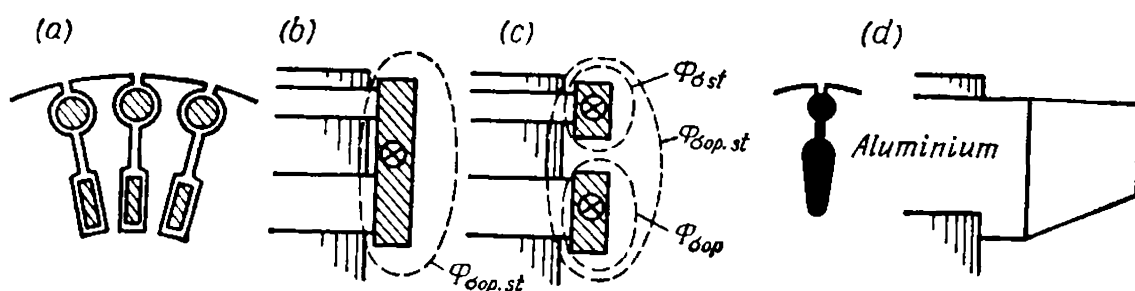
Design of rotor windings of a double squirrel-cage motor
